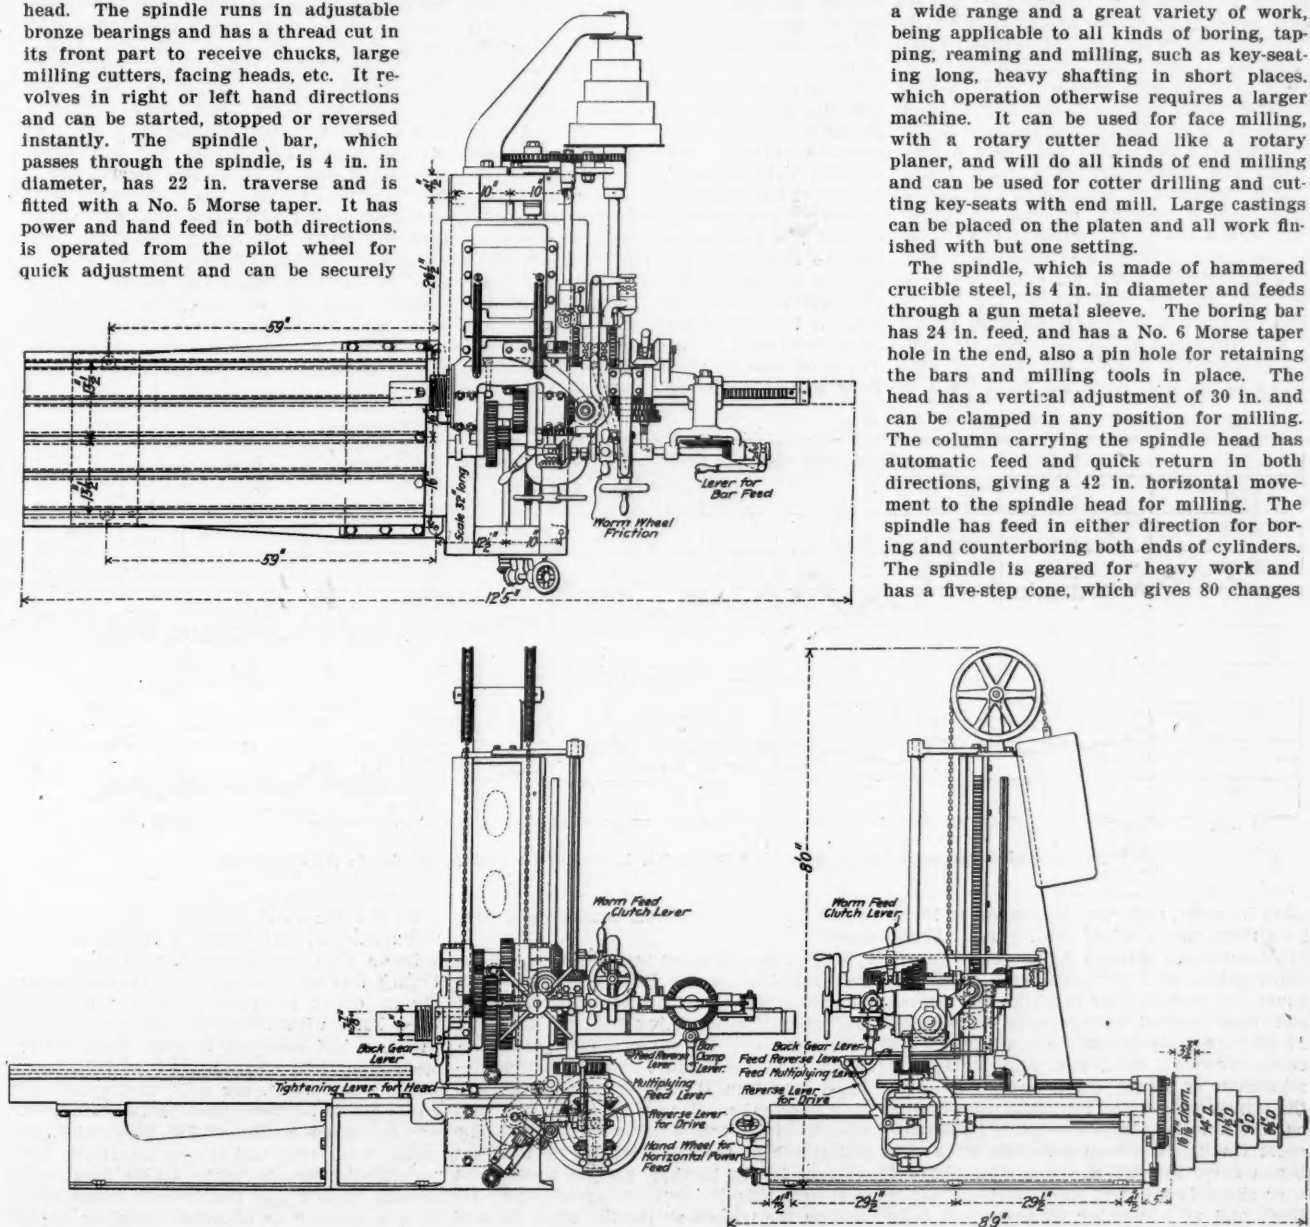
The Fosdick Horizontal Boring and Milling Machine.
